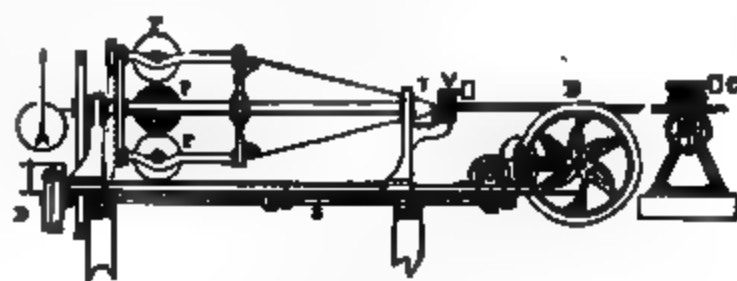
WIRE ROPE. A, heart; B, draw-off drum; C, friction drum; D, driving pulley; F, bobbins; T, top; V, tube; S, driving shaft.
